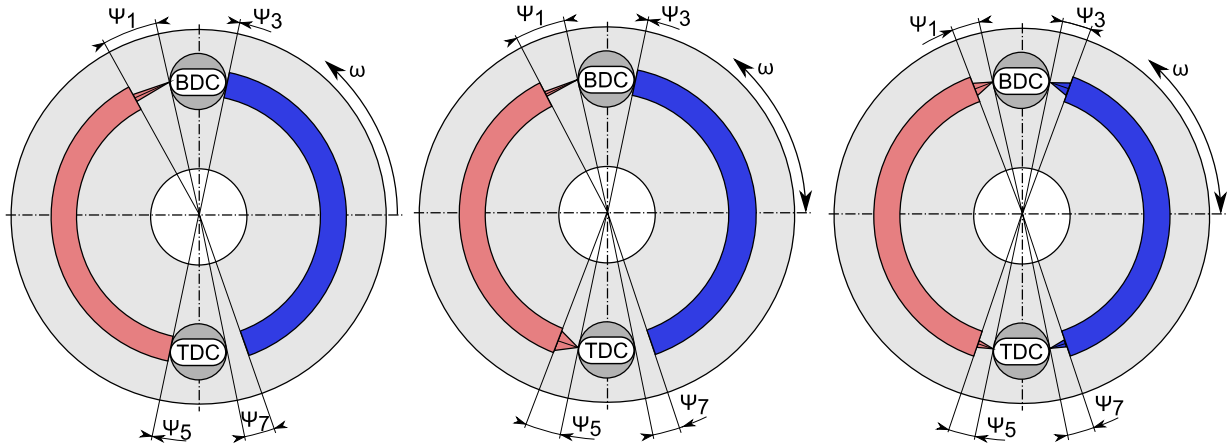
Qualitative valve plate designs for optimized 1-, 2- and 4-quadrant machines (from left to right)
